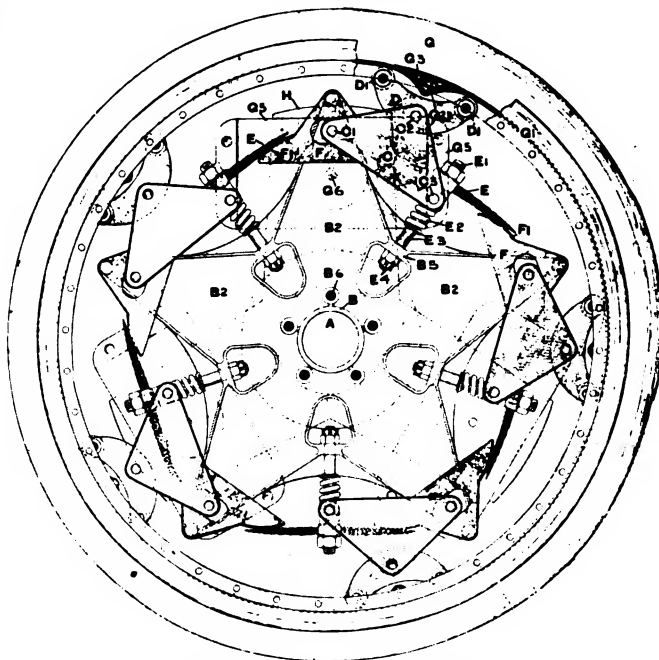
The "Empire" Wheel. View of the interior after removing the cover.
